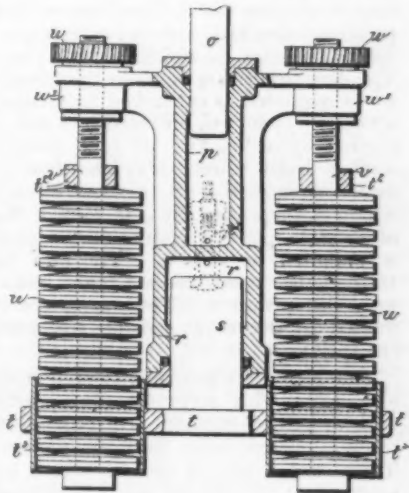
Enlarged View of Hydraulic Cylinder.
